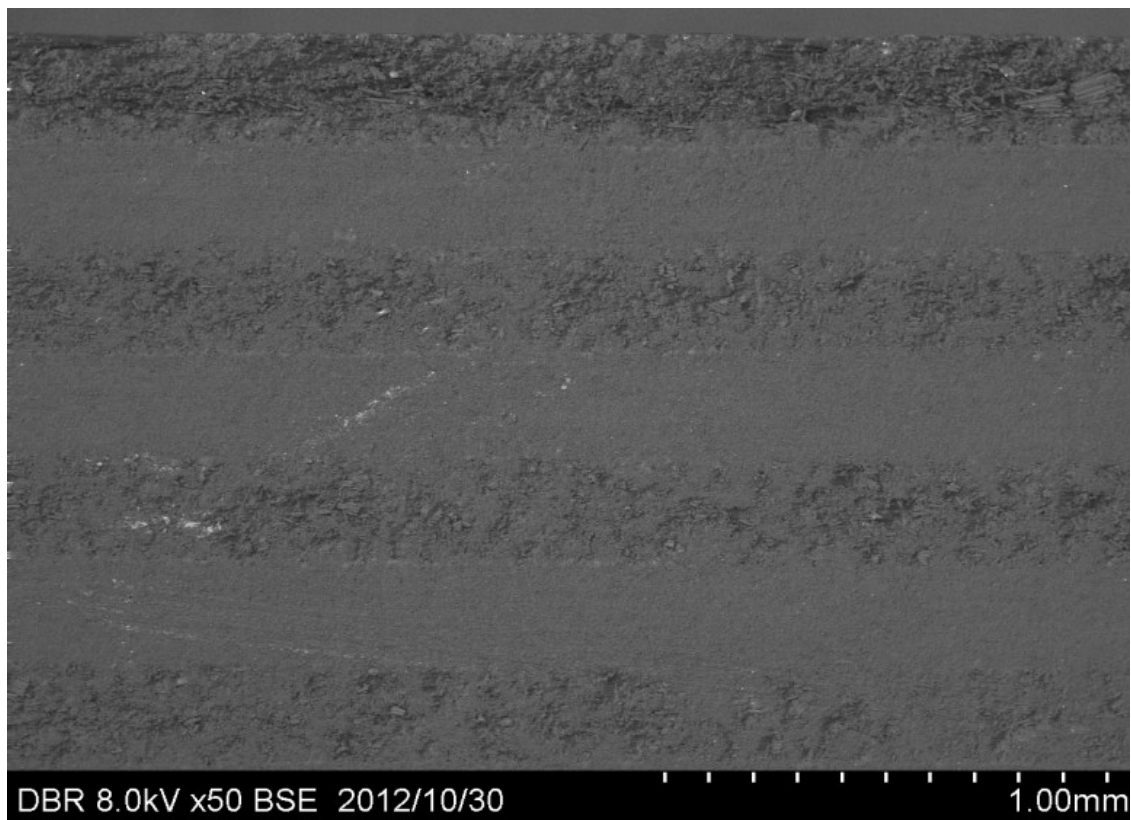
SEM image of finish surface of Material C 45°,-45° (Machined with Tool No. 1) (Up cut method)
